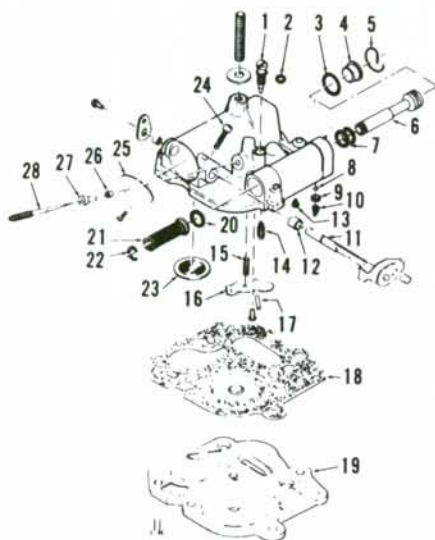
Exploded view of later McCulloch Model "W" series carburetor. Refer to Fig. MC6-4 for view of early model.
